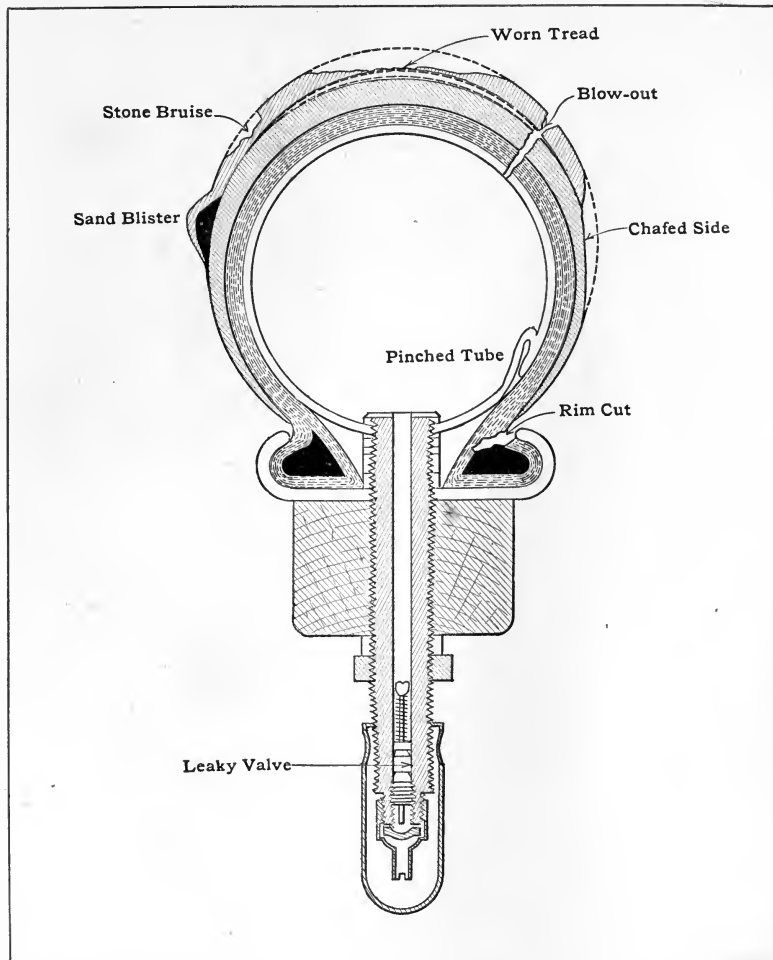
Sectional View of Pneumatic Tire Showing Some Conditions Which Cause Failure.
